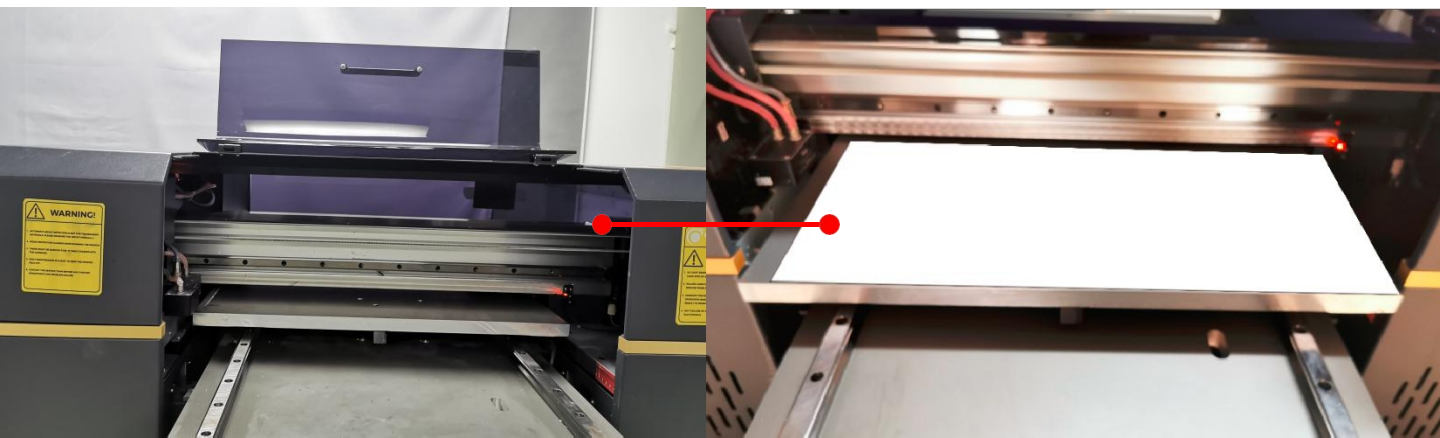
Open the cover carefully and take out the E-fixture mat from the working table
